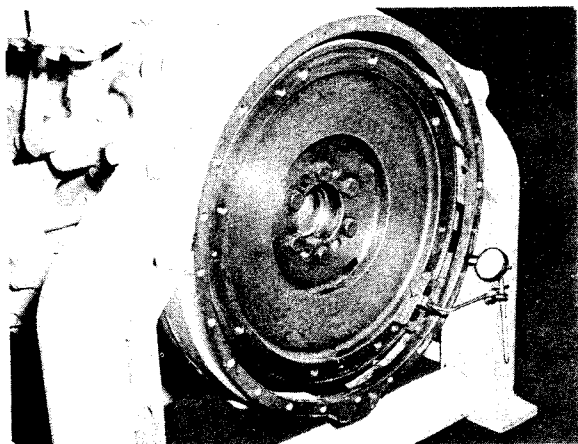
CHECKING ENGINE FLYWHEEL HOUSING RUNOUT
